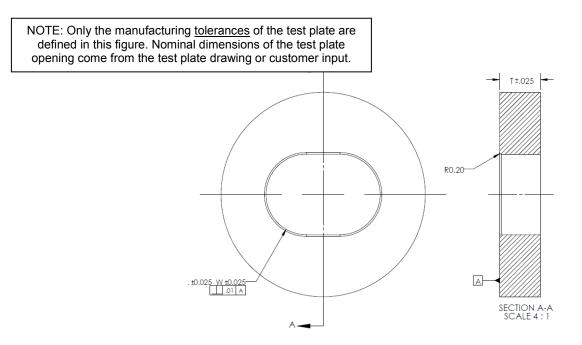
SAMPLE TEST PANEL SHOWING REQUIRED TEST PLATE TOLERANCES (IN MM)
